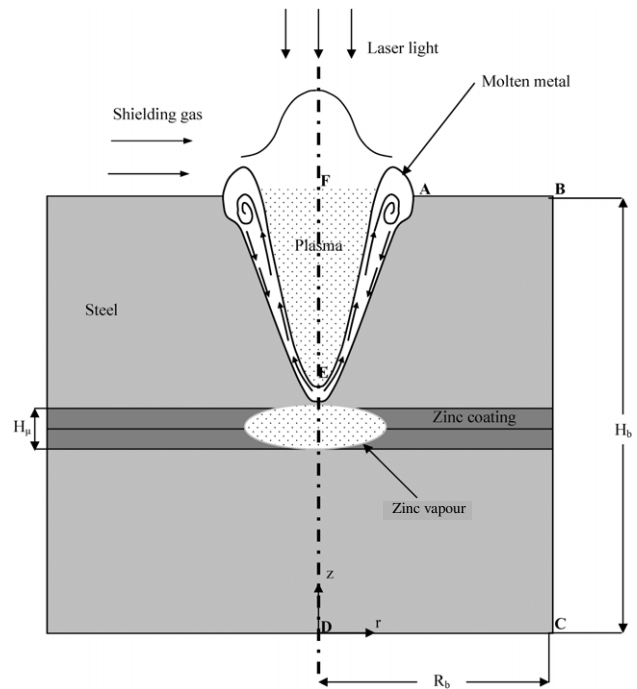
Schematic sketch of a pulsed laser keyhole welding of zinc-coated steels (not to scale).
